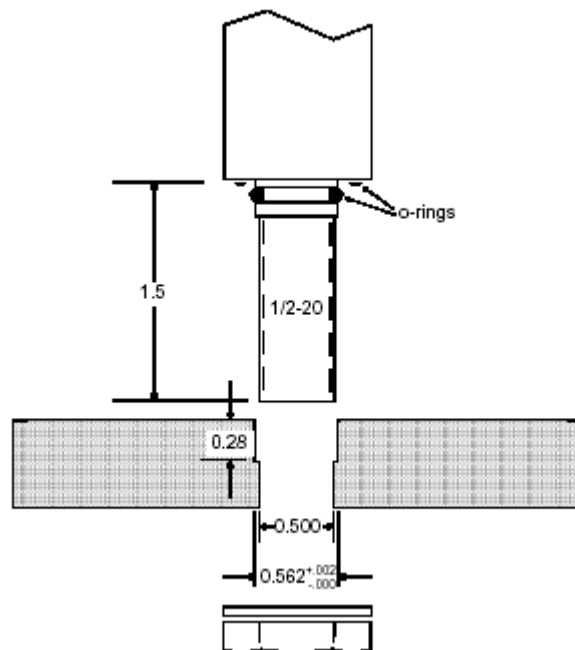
Drawing of Bulkhead Sensor and Customer Housing
